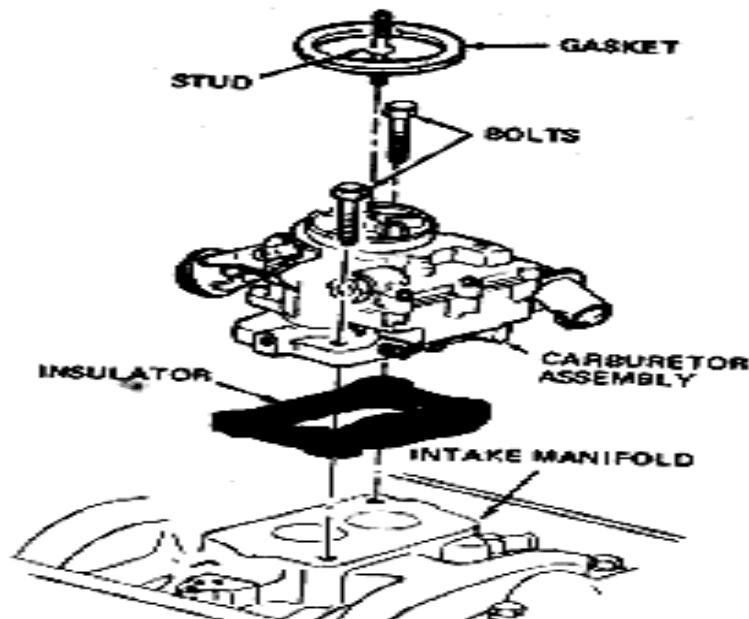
The carburetor Insulator Placed Between The Carburetor And The Intake Manifold
